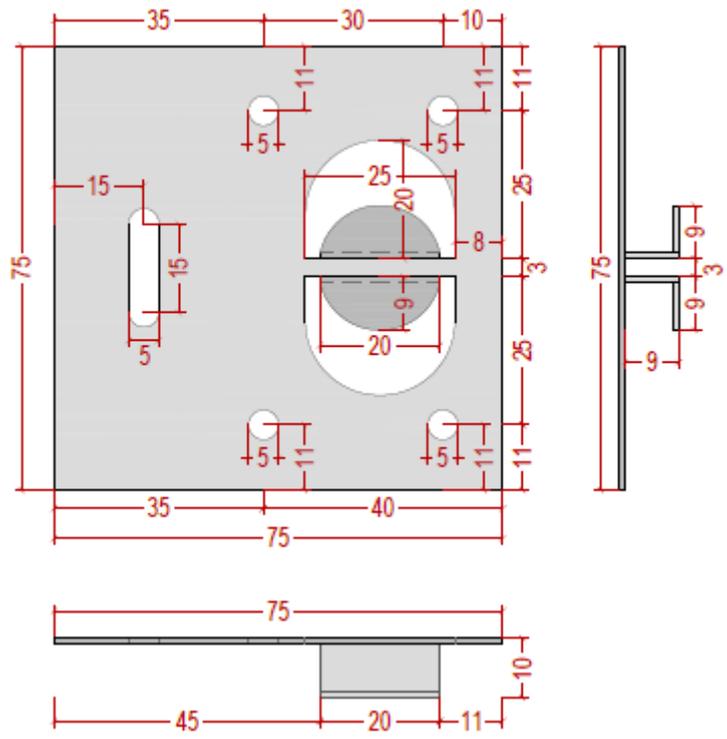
Technical drawing of the skin element fixing CRM.04A
